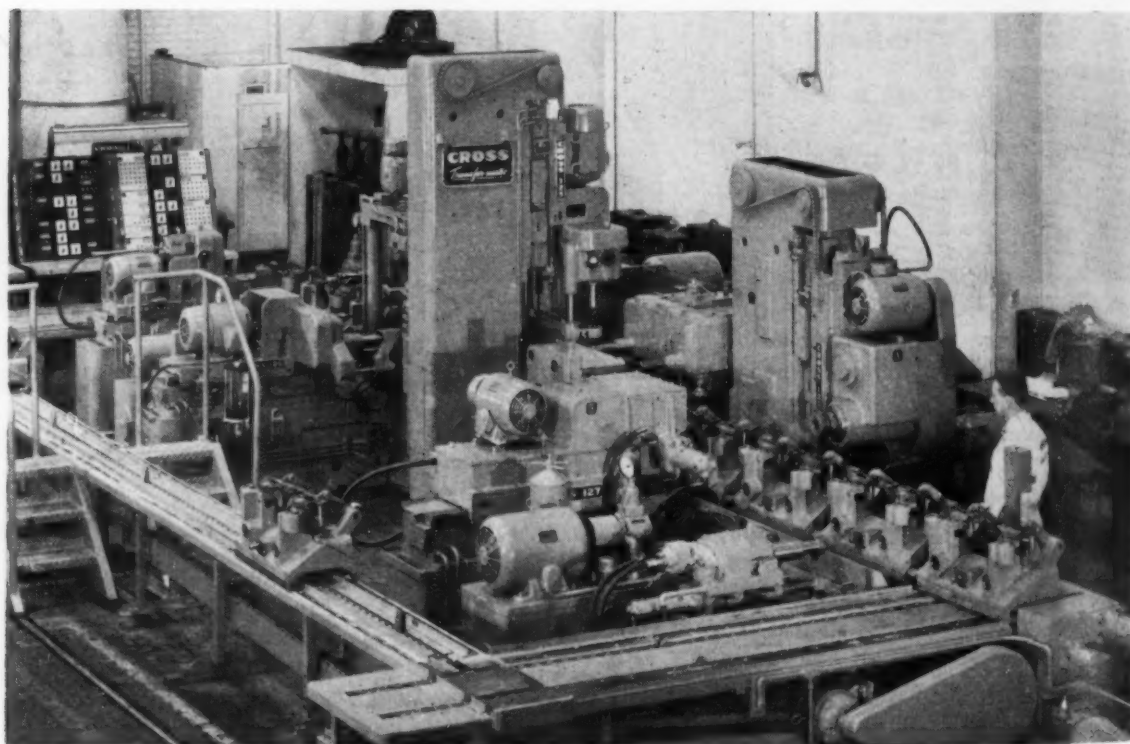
Pallet-type Transfer-matic machines built by Cross are designed to handle non-rigid, irregularly shaped parts.
